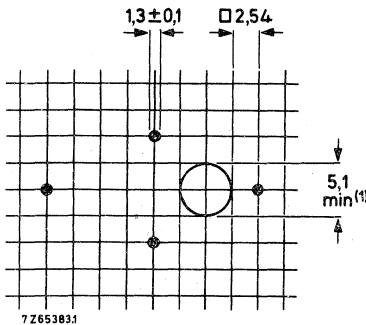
Hole pattern for mounting on a printed-wiring board.
